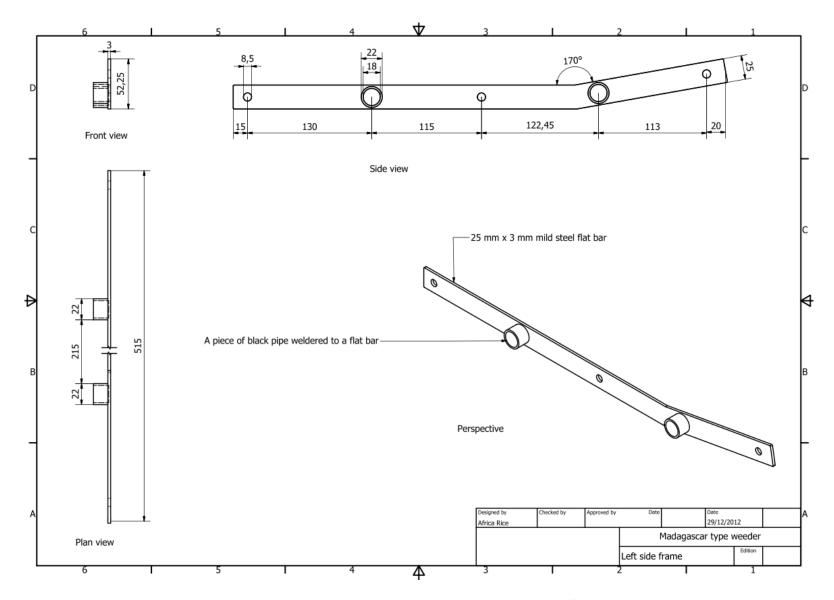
B: Technical drawing of the left side frame of the Twisted-Spike Floating Weeder
